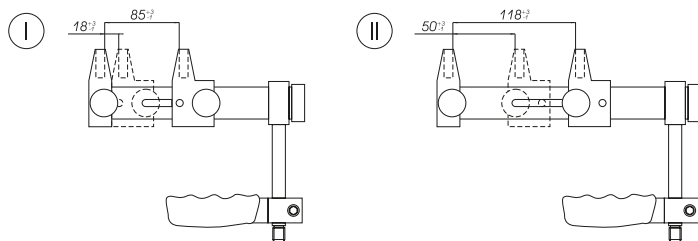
Useful range of the foot operated hydraulic press machine jaws
